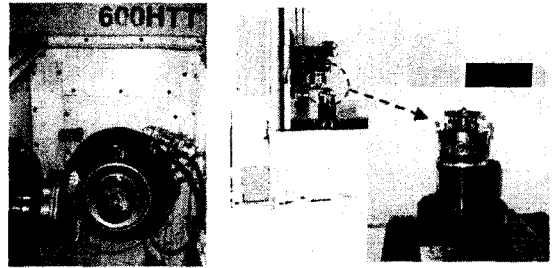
Hypoid Gear & Helical Gear of Single flank tester
